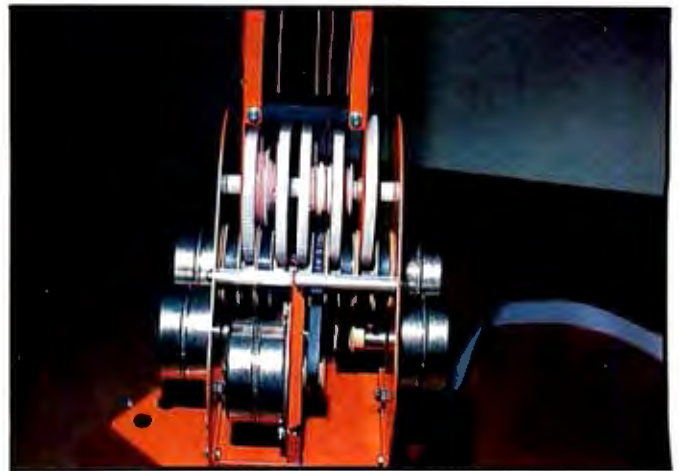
The shoulder contains five of the six stepper motors. Reduction gears are used to increase the force applied via the drive cables.
